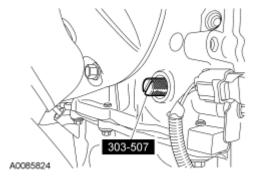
Identifying Special Tool Courtesy of FORD MOTOR CO.
